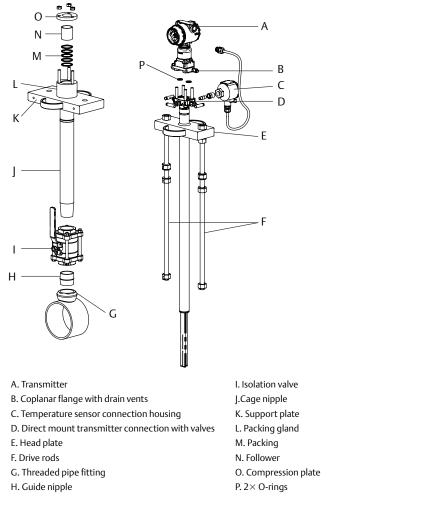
Rosemount 485 Annubar Threaded Flo-Tap Assembly Exploded View
